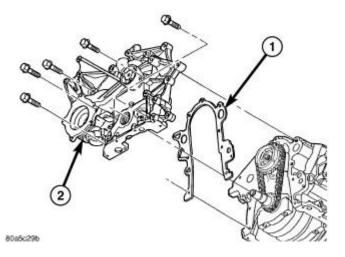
TIMING CHAIN COVER AND GASKET Courtesy of CHRYSLER LLC
